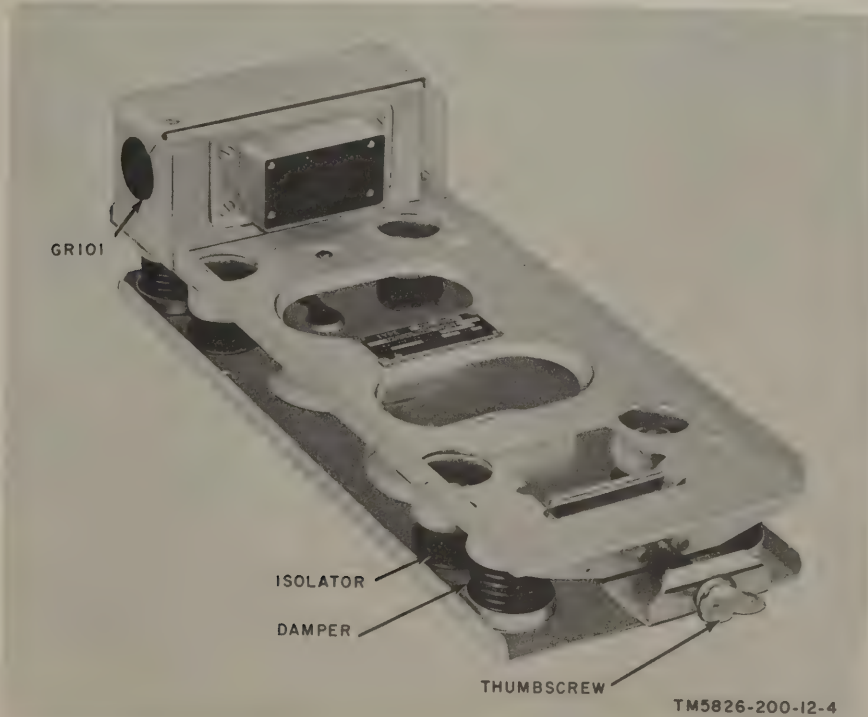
Vibration Mounting MT-1762/AR, front oblique view
